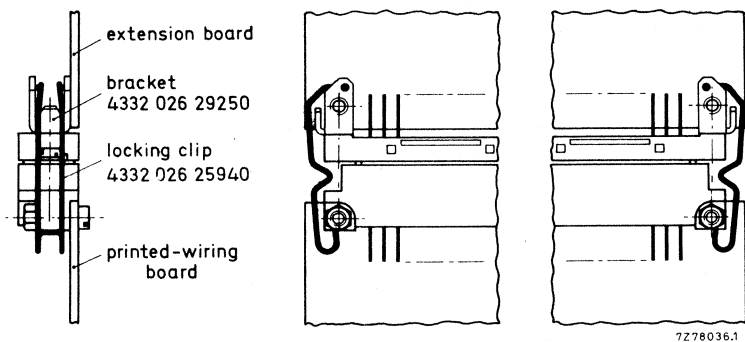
Mounting of a female part to an extension board with bracket having locking facility.
